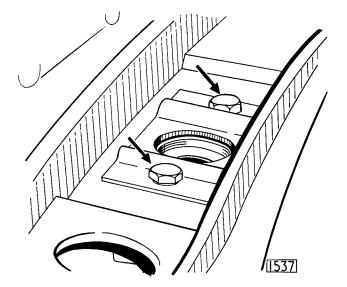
Showing the two setscrews which secure the bonnet catch striker plate.
